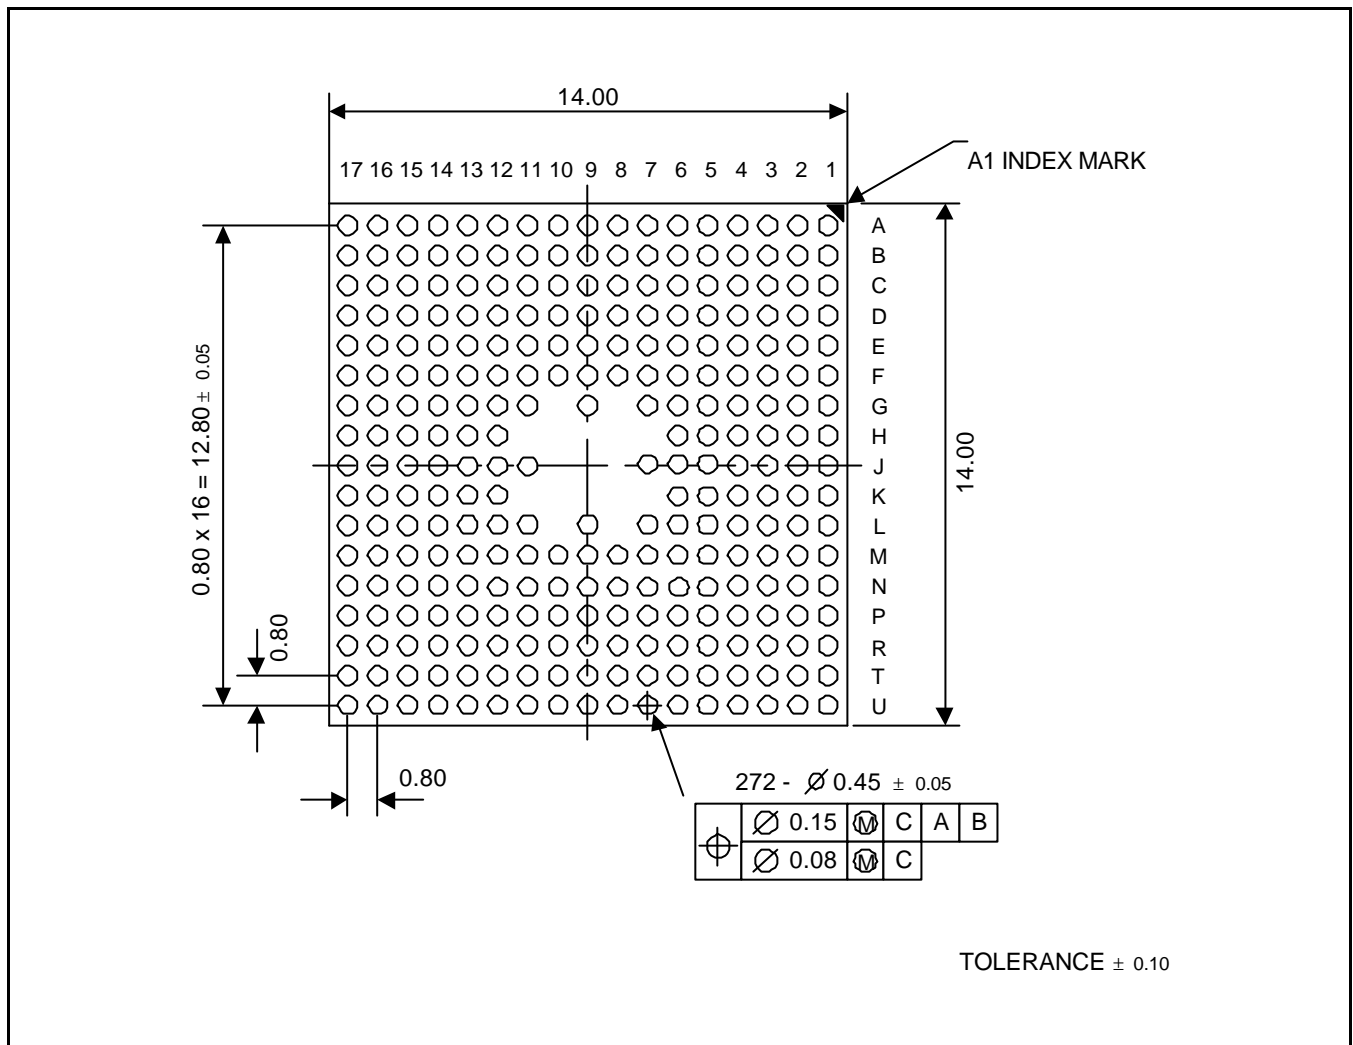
272-FBGA-1414 Package Dimension 2 (Bottom View)
